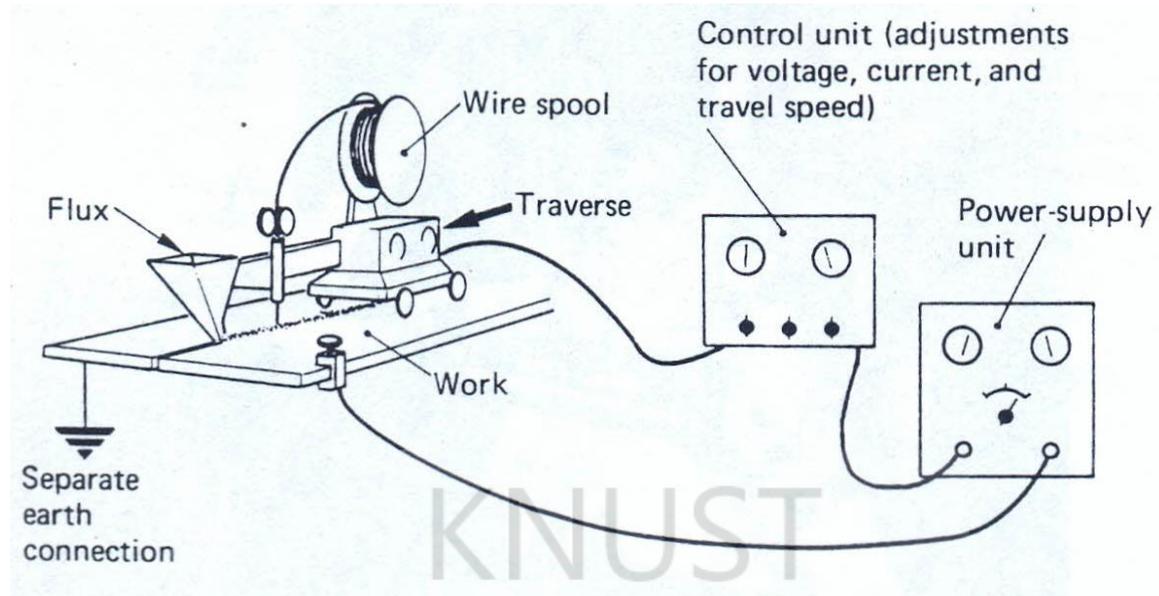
Equipment for submerged-arc welding (note that other types of traverse mechanism can be used) (Gourd L. M. 1995)
